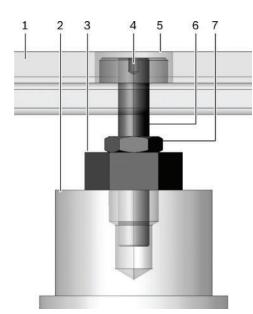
Adjusting the Leg Support 1 Cover plate 2 Threaded bolt with two-hole nut
